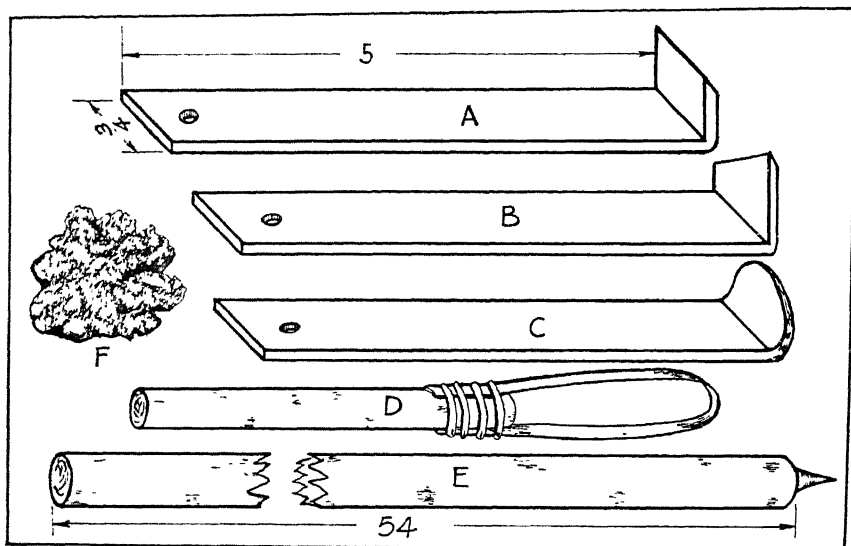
Turning tools. *A* and *B*, square and skew-pointed tools used in smoothing surfaces; *C* and *D*, round-nosed and loop tools used in making rough cuts; *E*, tool holder or turning stick made from a broom handle with a sharp nail for a spur. *F*, sponge used to wipe the piece when the turning has been completed. The loop tool at *D* is made by wiring a piece of handsaw blade to a round stick.
